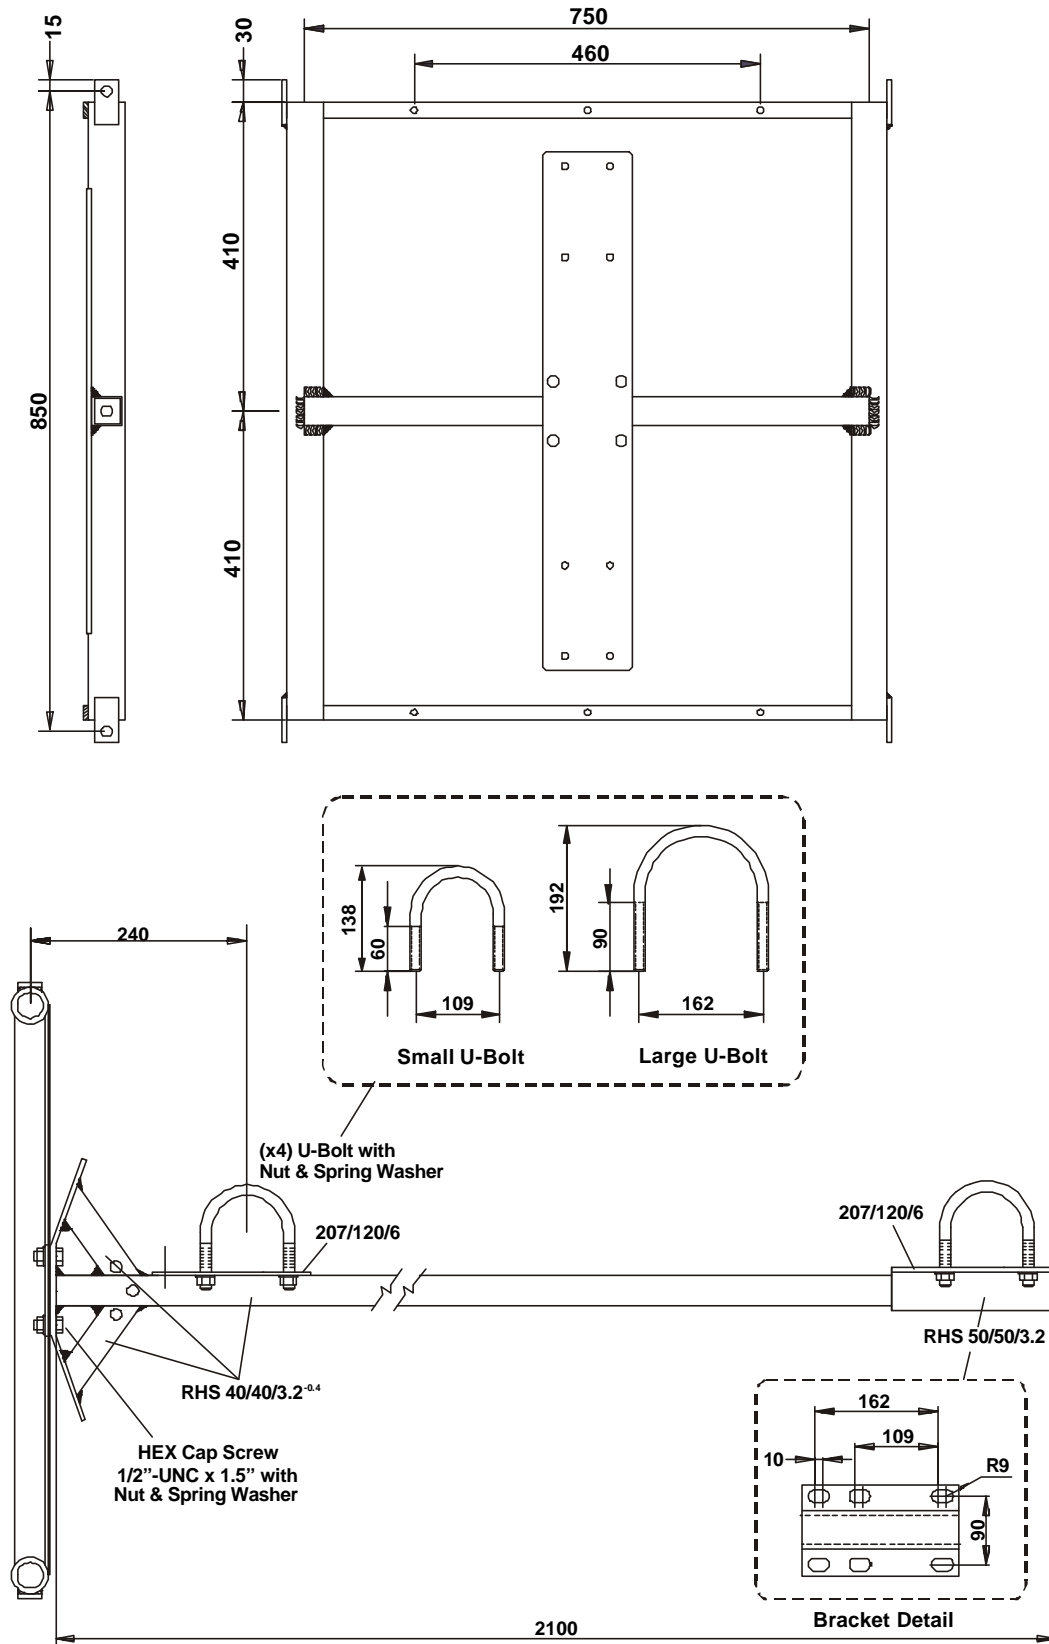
Typical Wide H-Support for Tower Mounting, Option 2, Mechanical Details
